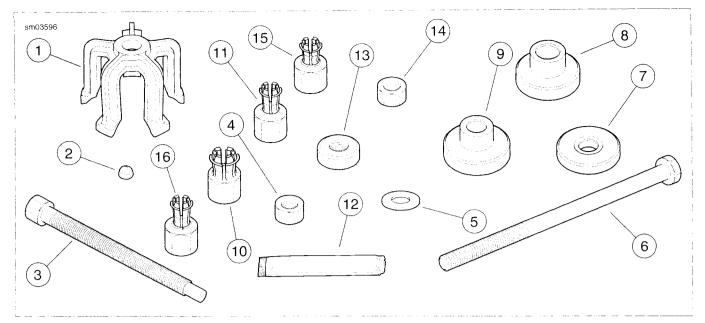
Wheel Bearing Remover/Installer (HD-44060-C) (See Table)
